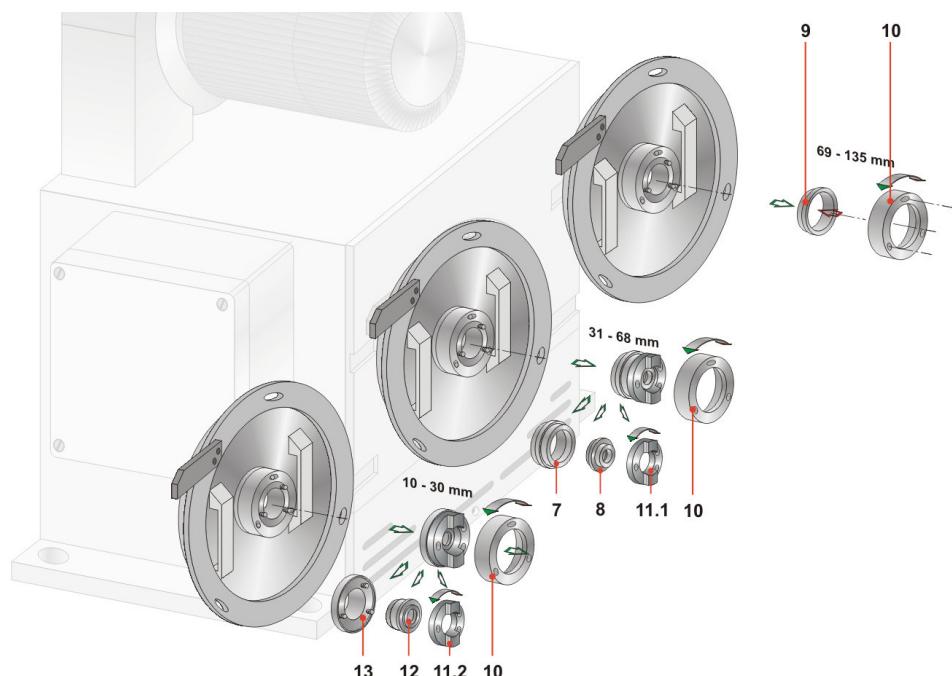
Fitting nozzles entry side, legend see Chap.2.7
